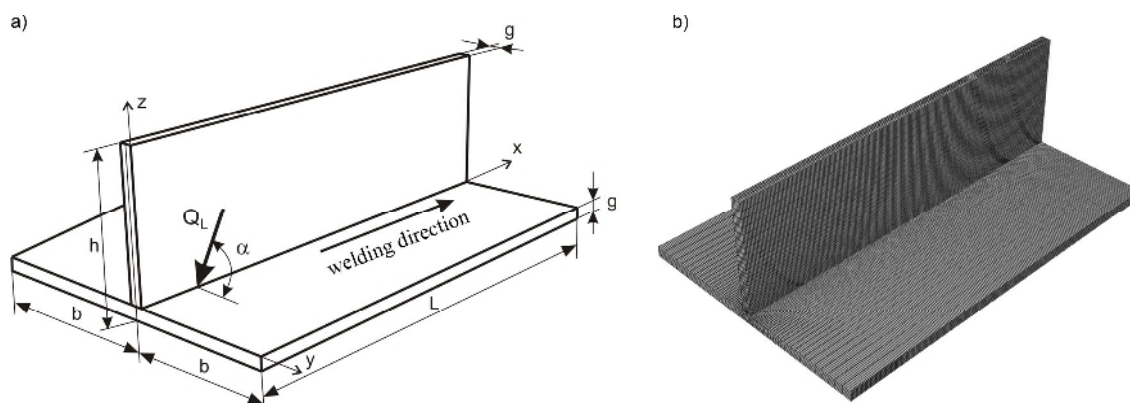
Laser beam welding of T-joints, a) scheme of considered system and b) finite element mesh
